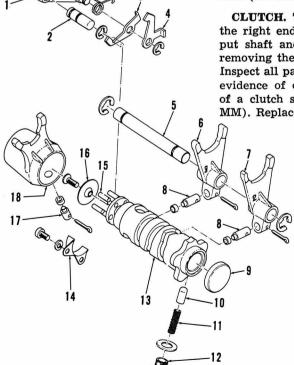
Exploded view of shift components used in DT-1 and RT-1 models.
